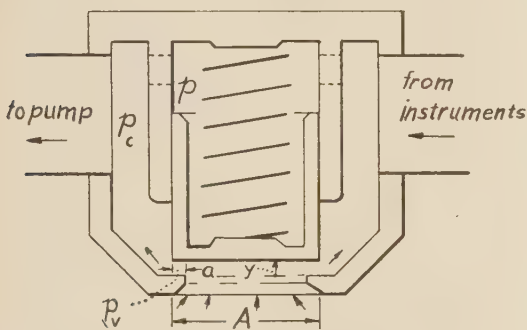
FORMER TYPE VALVE WITH FLAT SURFACE AT a , TO MINIMIZE LEAKAGE WHEN SHUT
